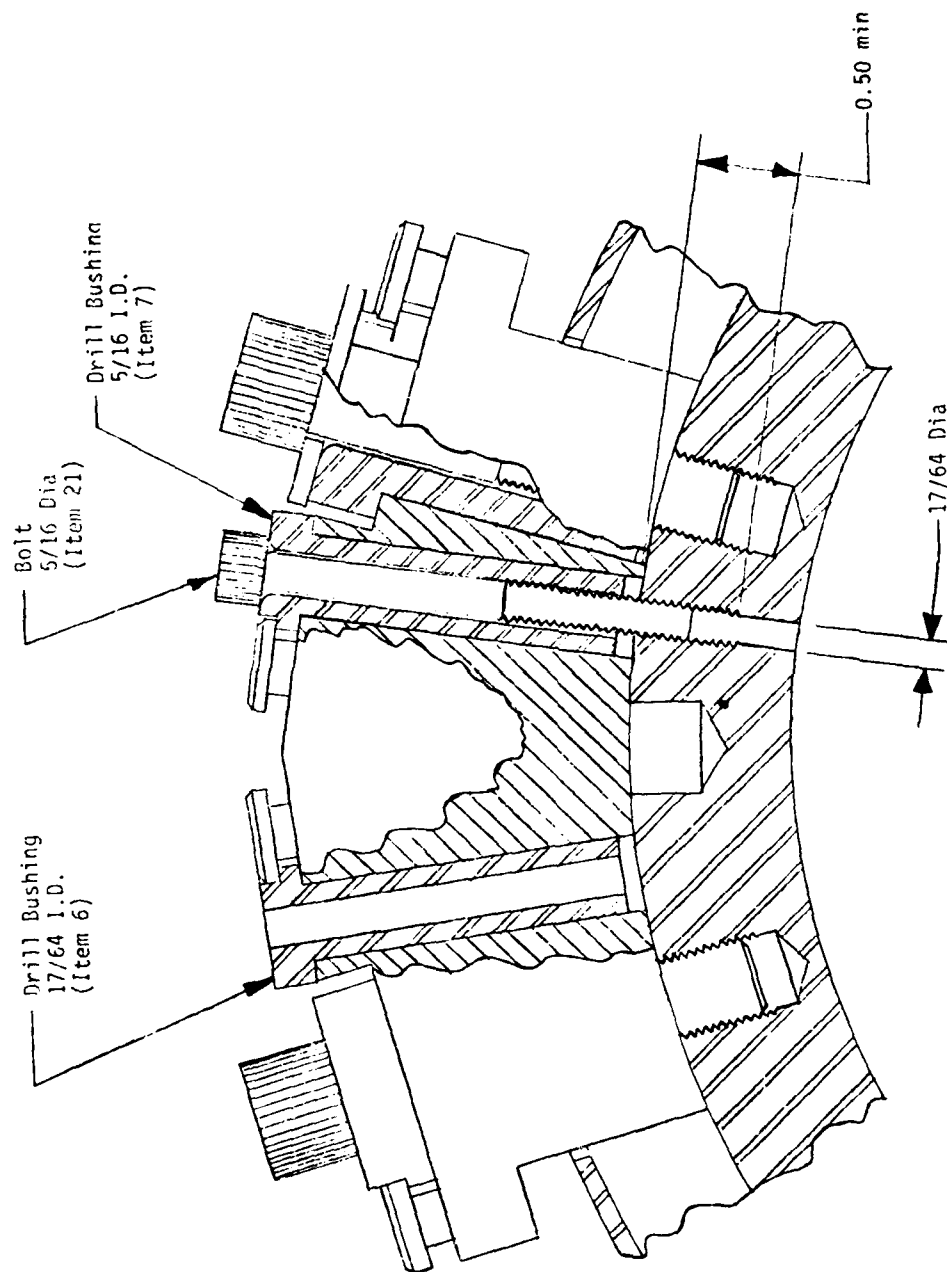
Keensert installation: One clamp bolt installed and ready to drill the second hole.
